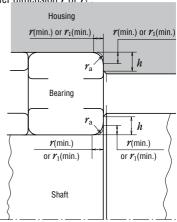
Chamfer Dimensions, Fillet Radius of Shaft and Housing, and Shoulder Height
